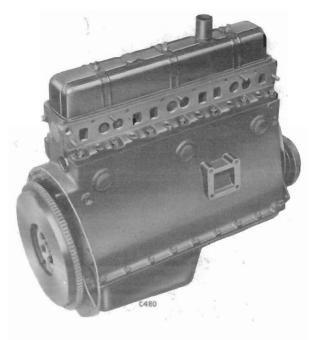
Right-hand rear view of Vitesse reconditioned unit
